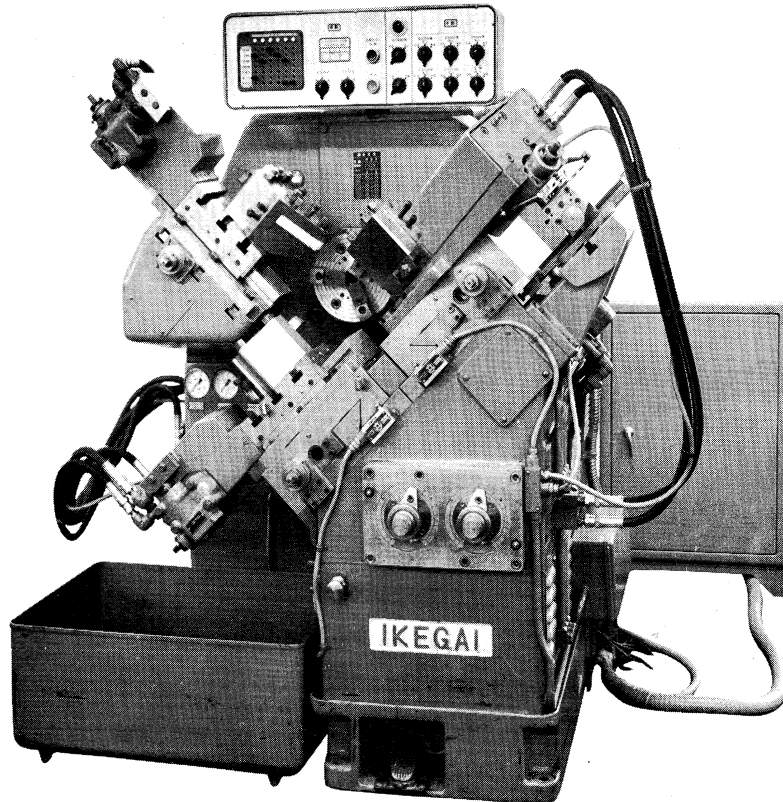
Chuck Master Automatic Chucking Machine, Model AF 360, by Ikegai Iron Works, Ltd.
